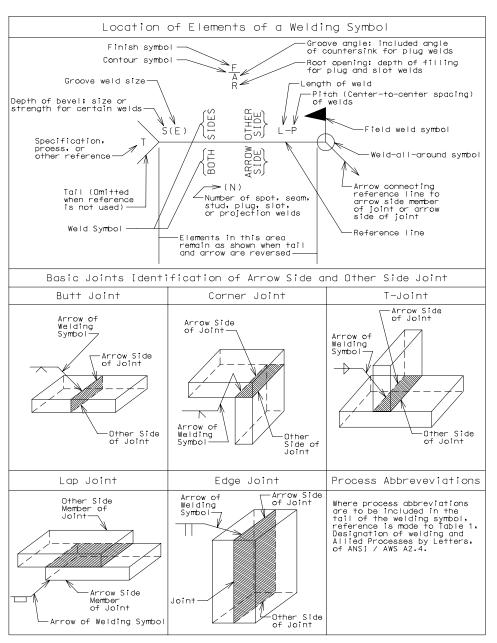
Standard Welding Symbols from AWS A2.4
